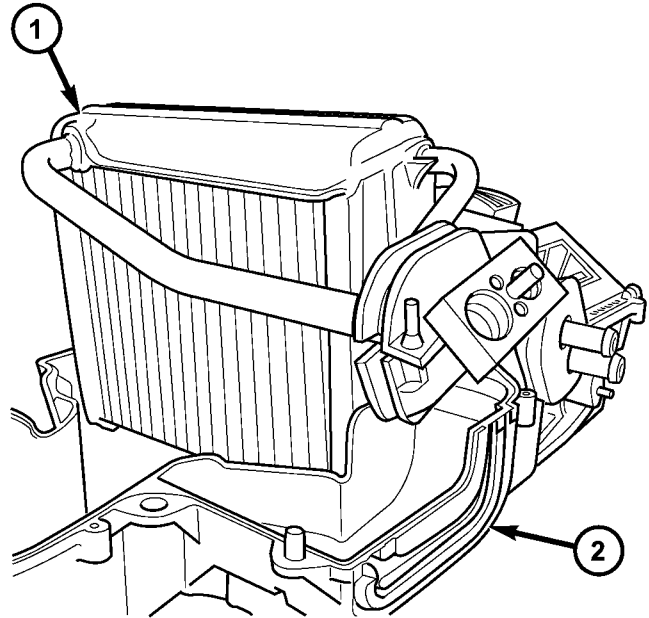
EVAPORATOR COIL (NEW) H-VALVE
